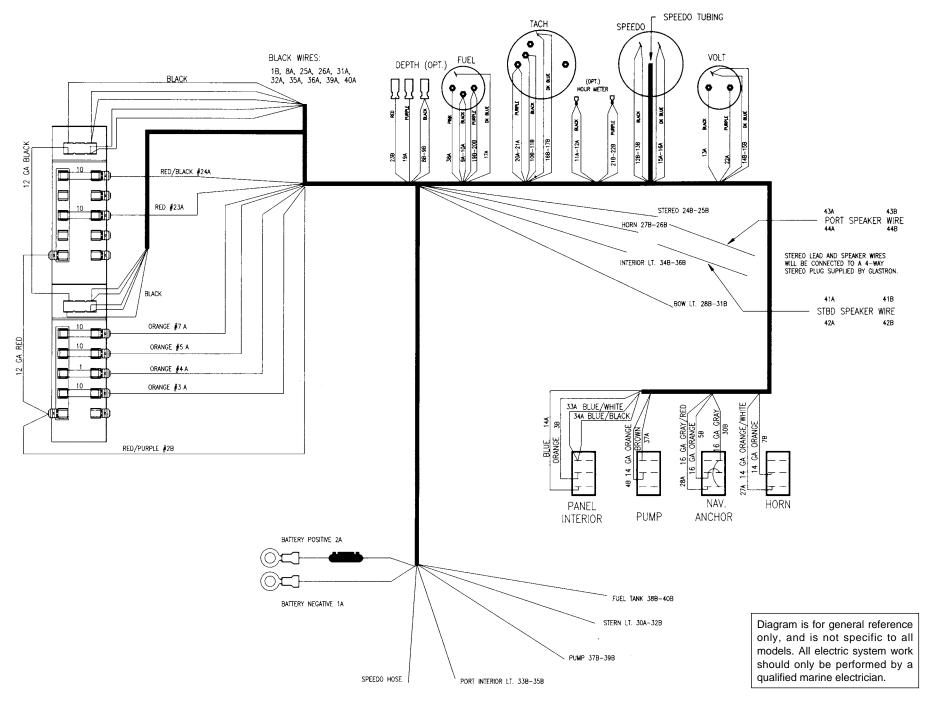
OUTBOARD WIRING ASSEMBLY
